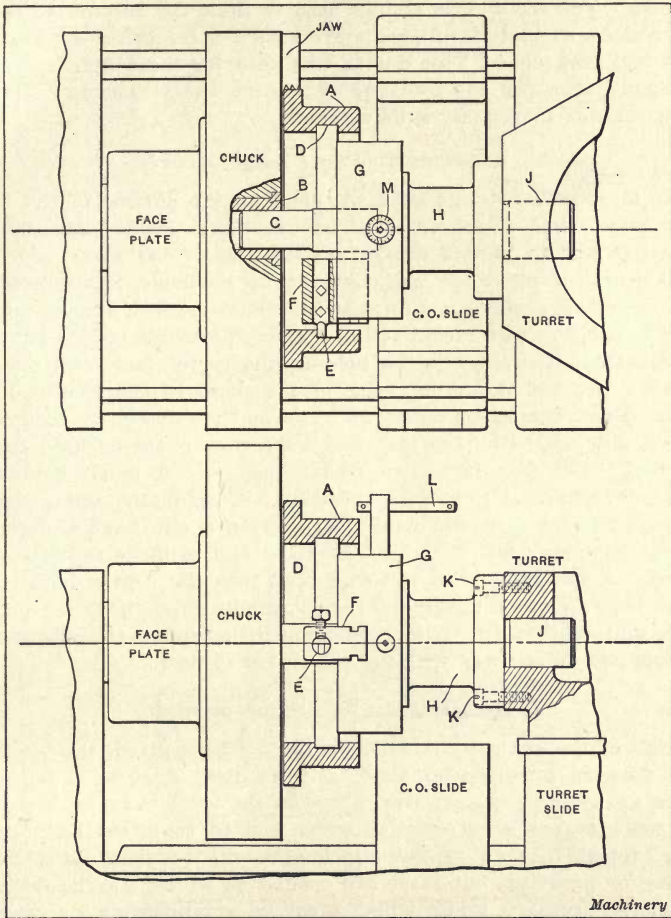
A Recessing Tool for a Large Collar, used in a Turret Lathe
